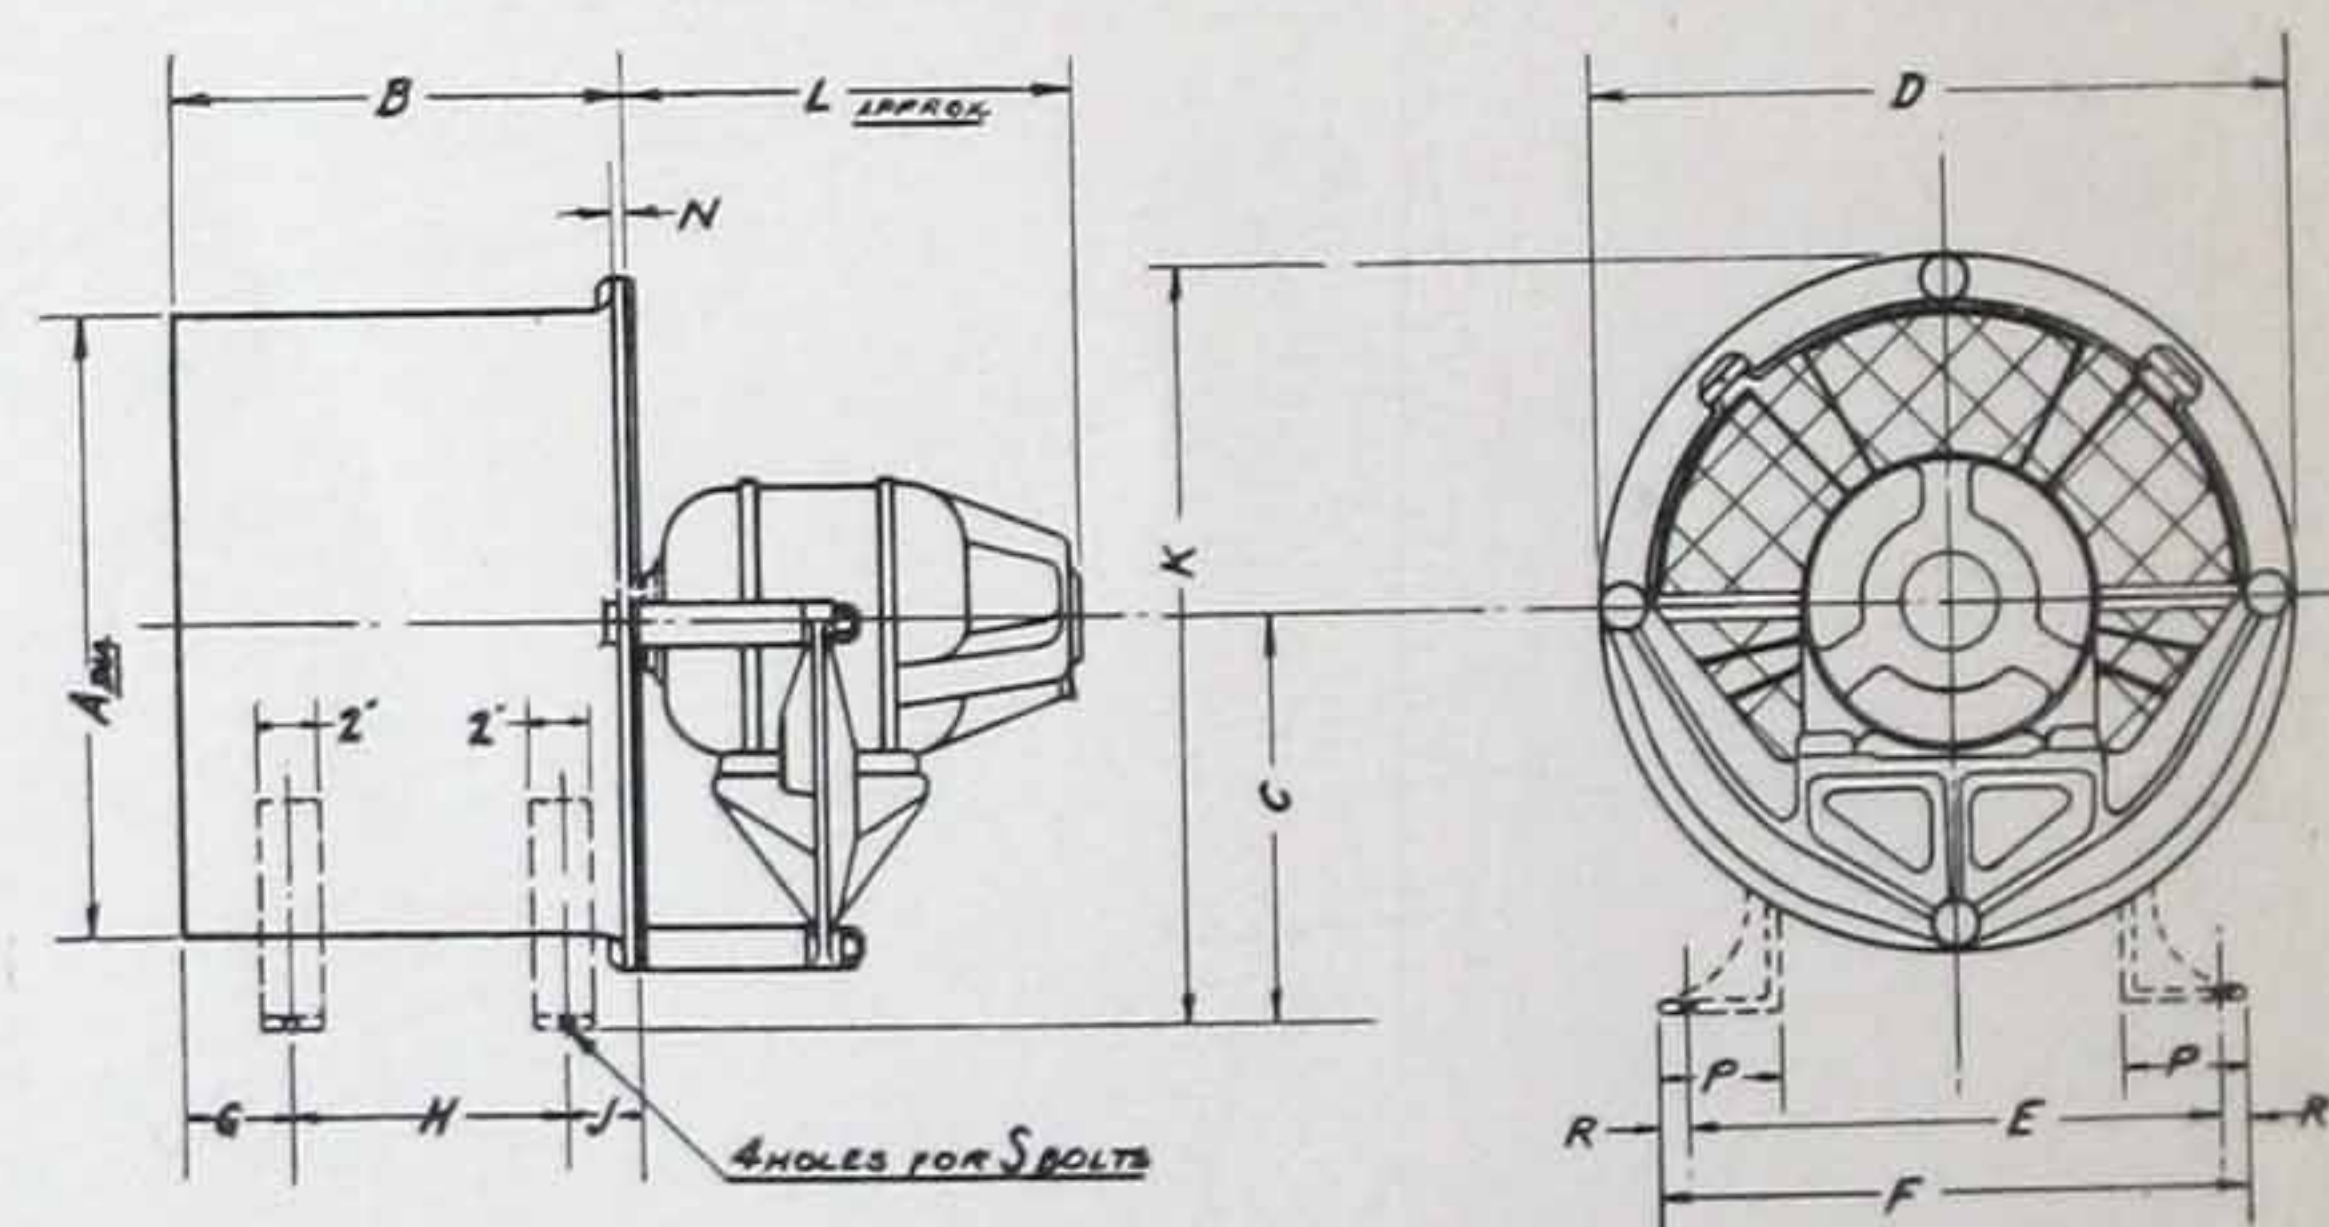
Dimension drawing, sizes 7S to 15S. (These units are furnished with or without mounting feet.)
